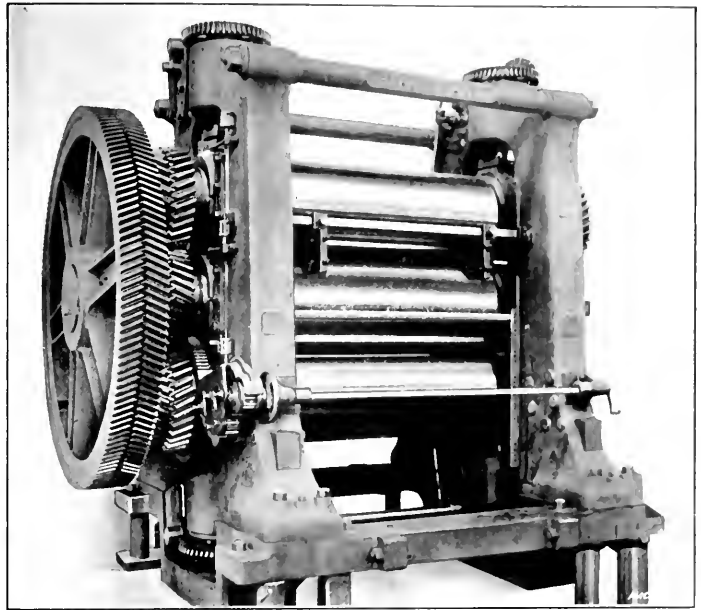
Heavy-duty Three Roll Calender for Rubber Tire Work, equipped with Herringbone Gears
